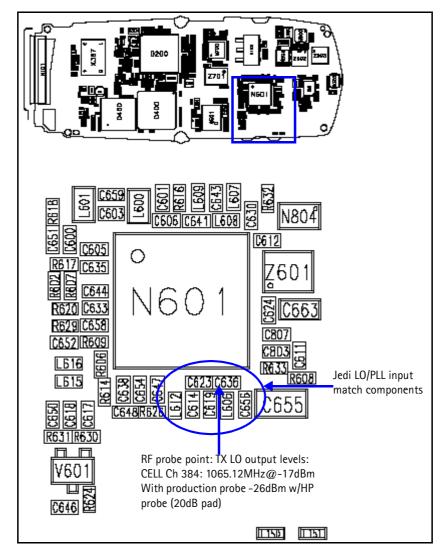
PWB, bottom side (top). A zoomed view of the Jedi LO/PLL input match components on the UHF synthesizer layout (bottom).
